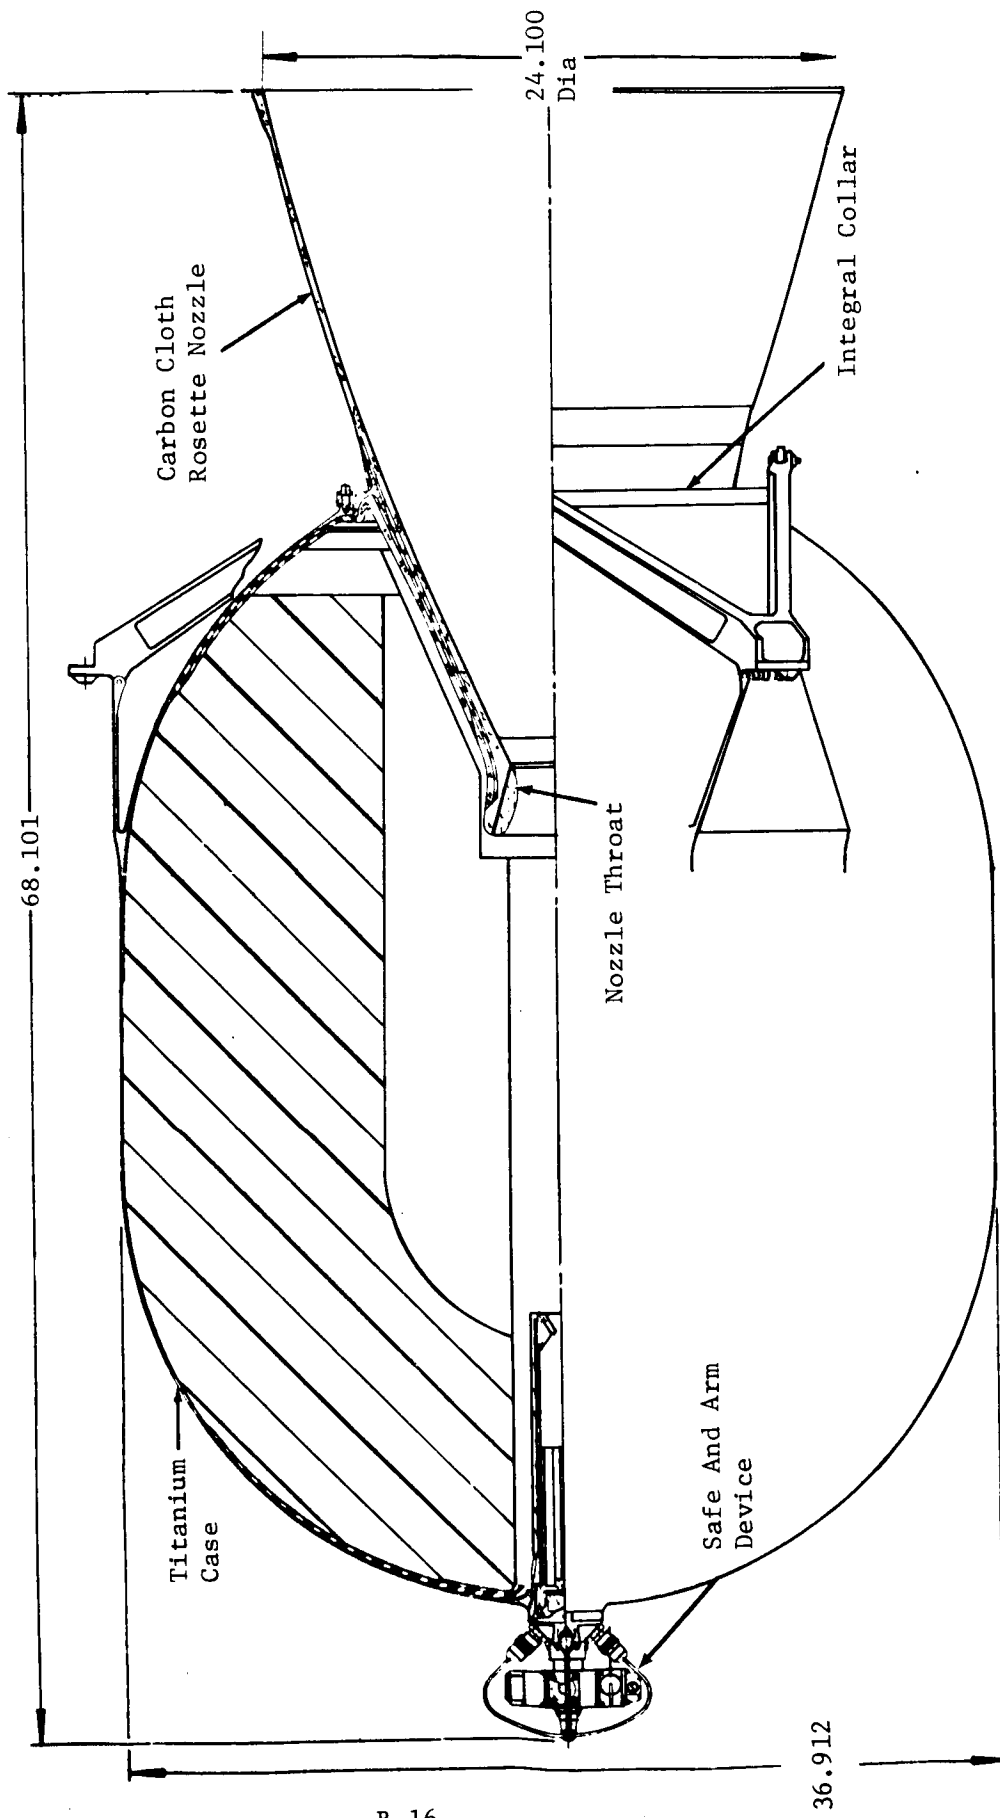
TE-364-2 BURNER II ROCKET MOTOR ASSEMBLY
